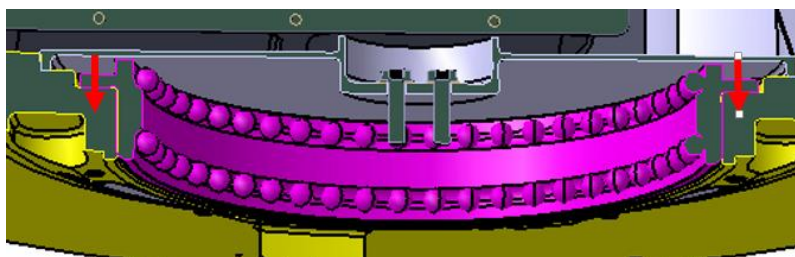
Zoom of grounding between Carousel and Rotor assembly
